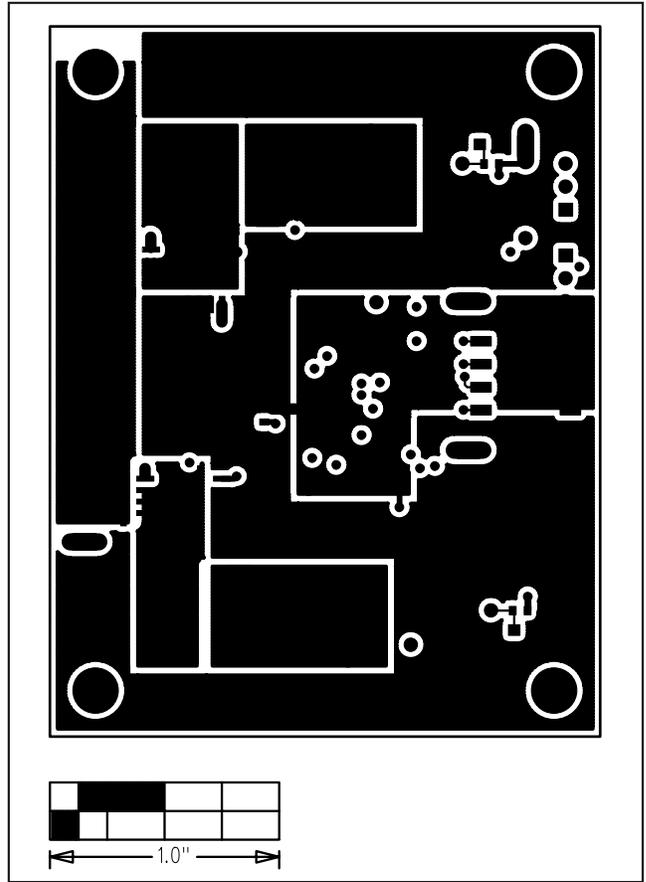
MAX17020 EV Kit PCB Layout—Component Side
